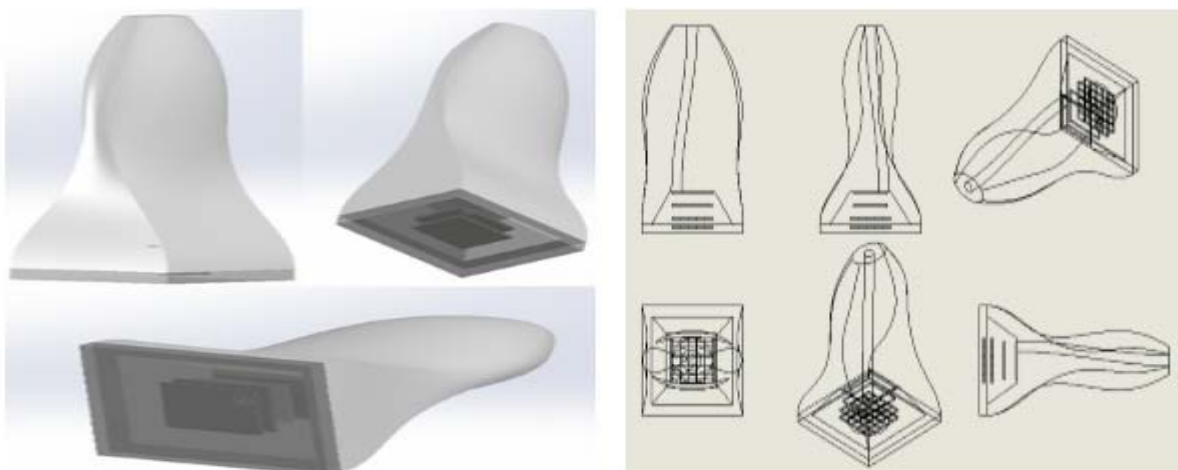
Geometric view of tactile probe/Metal array shape inside of a tissue-like silicon.
